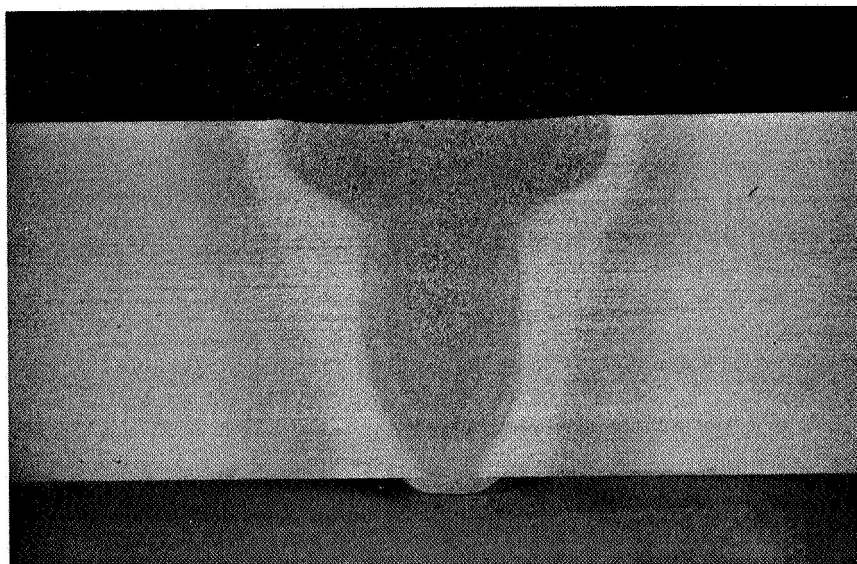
Out-of-Vacuum Electron Beam Weld in
